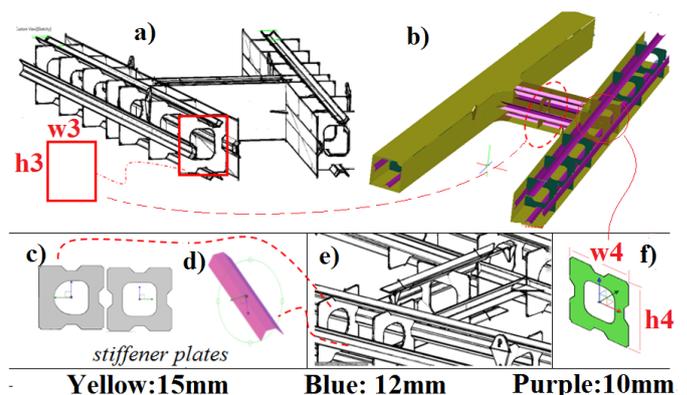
a, b and e) various explosive vies of the MIDDLE part of the crane structure; c, f) cross-sectional inner brackets; d) longitudinal inner brackets
